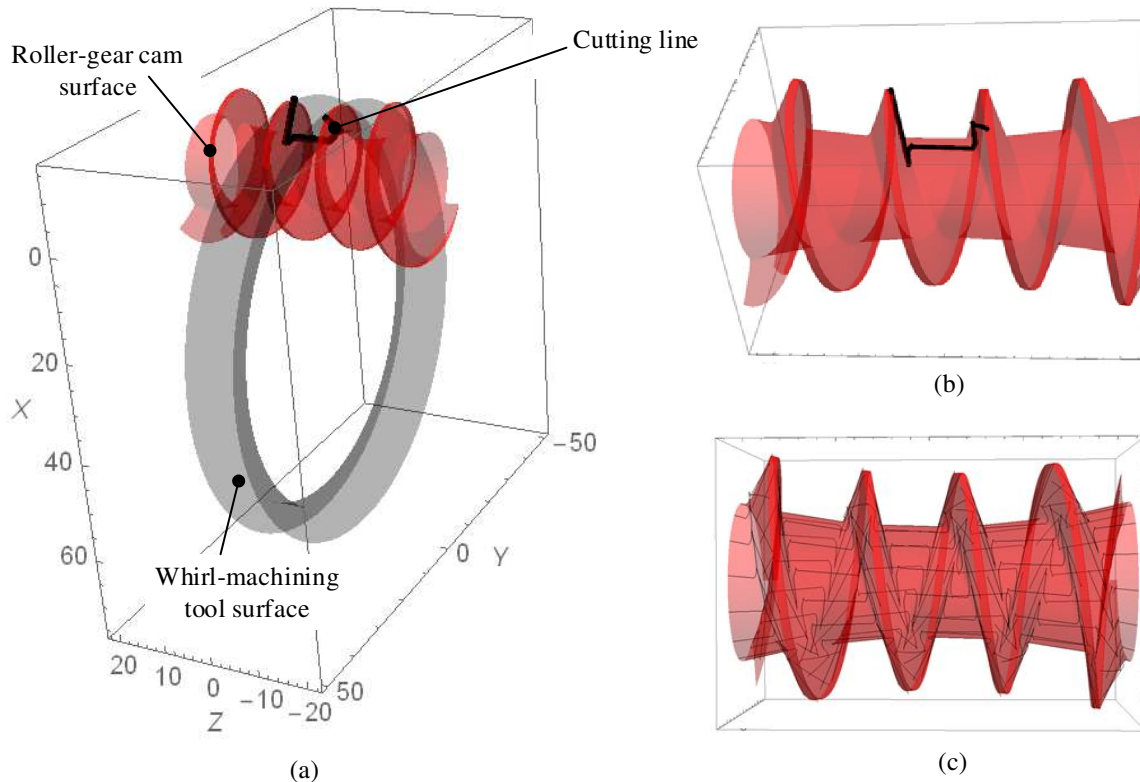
Cutting simulation result: (a) assembly of tool and roller-gear cam, (b) single generated cutting line, and (c) trajectory of cutting line over the roller-gear cam
